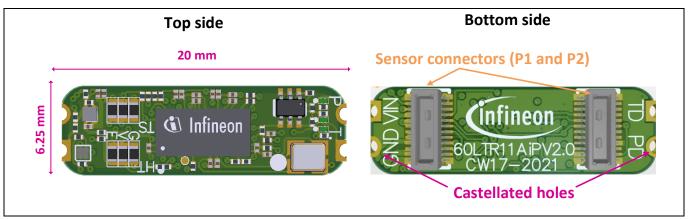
Top and bottom view of BGT60LTR11AIP shield
